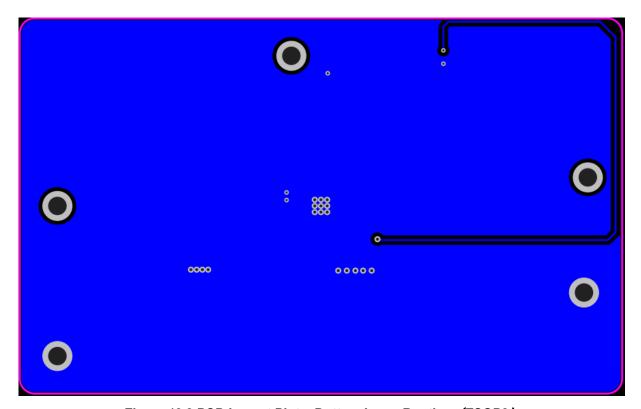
PCB Layout Plots: Bottom Layer Routing (ESOP8)
